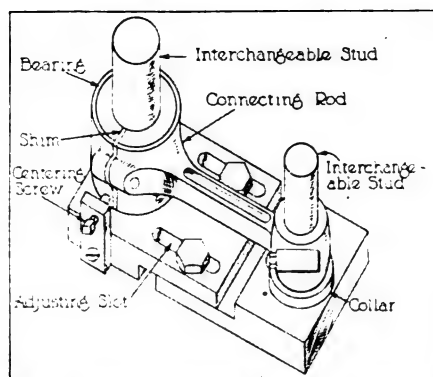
Fixture Which Aids Materially in Realigning and Rebabbiting Connecting Rod. Note Adjusting Slot.
